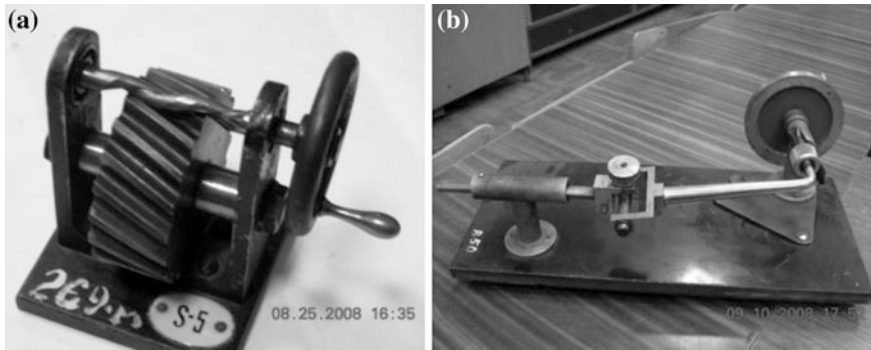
Models of L. Reshetov: a single-tooth gear, b mechanisms without redundant links
